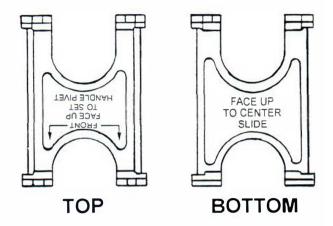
Use of Alignment Tool TT-150 During Slide/Guide Assembly
